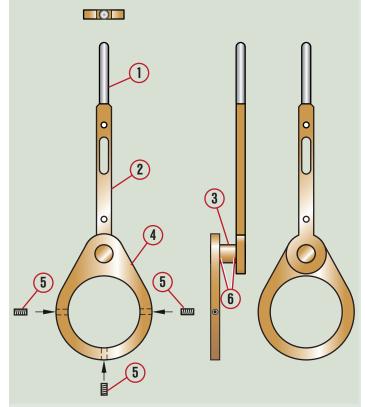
Arm-yoke subassembly, full size. 1 — Johnson bar handle; 2 — Johnson bar arm; 3 — connector arm; 4 — yoke; 5 — o-80 by 0.188-inch cup point set screw; 6 — soft solder the three together.
